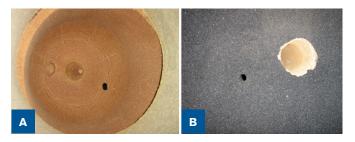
(A) Pop-off hole drilled through sleeve and cope (B) Top of the mould. Pop off hole and chamber vent
